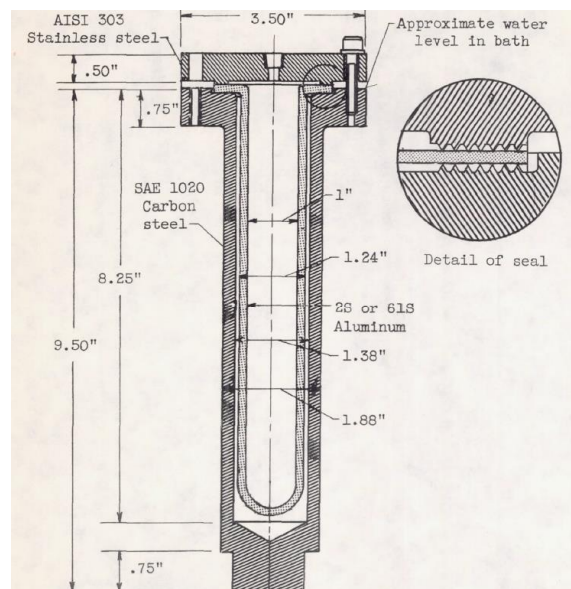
Engineering drawing of storage test vessel (Feiler & Morrell, 1952)
